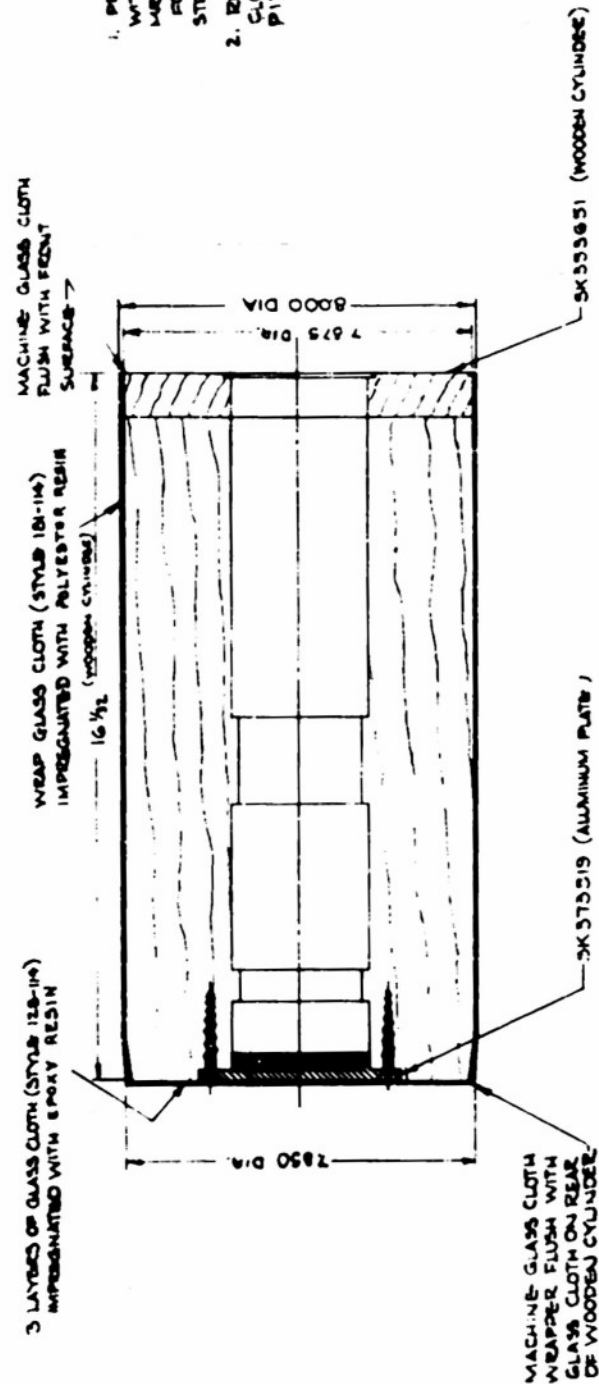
MISSILE, WRAPPED AND READY FOR MACHINING
